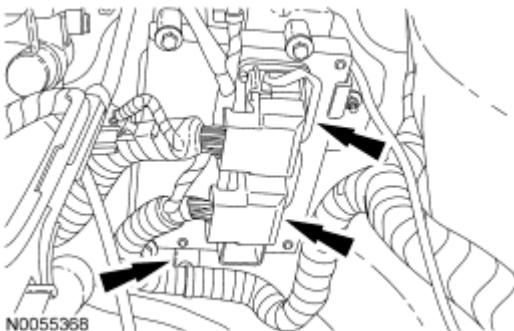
Identifying Electrical Connectors From Power Control Module (PCM)
